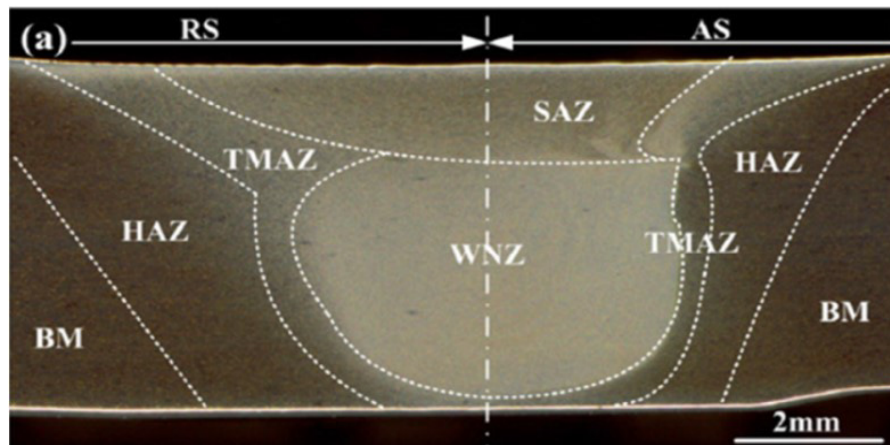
AA2219-T6 weld cross-section of RDR-FSW at 100 mm/min welding speed and 800 rpm rotational speed for both tool pin and reversely rotating shoulder (abbreviations are mentioned in caption of Figure 17) [131].
